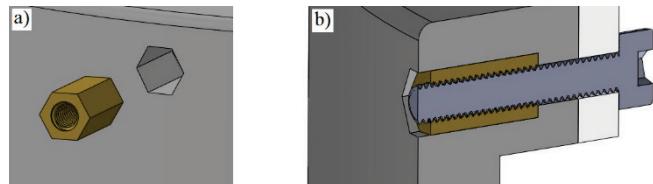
Thread joint: a) Pocket for Hex bolt, b) Cross-section of thread joint
